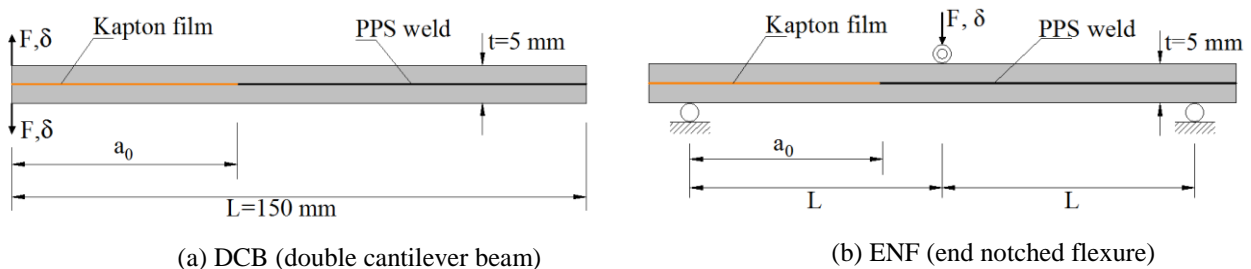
Dimensions and geometry of mode I (DCB) and mode II (ENF) specimen
